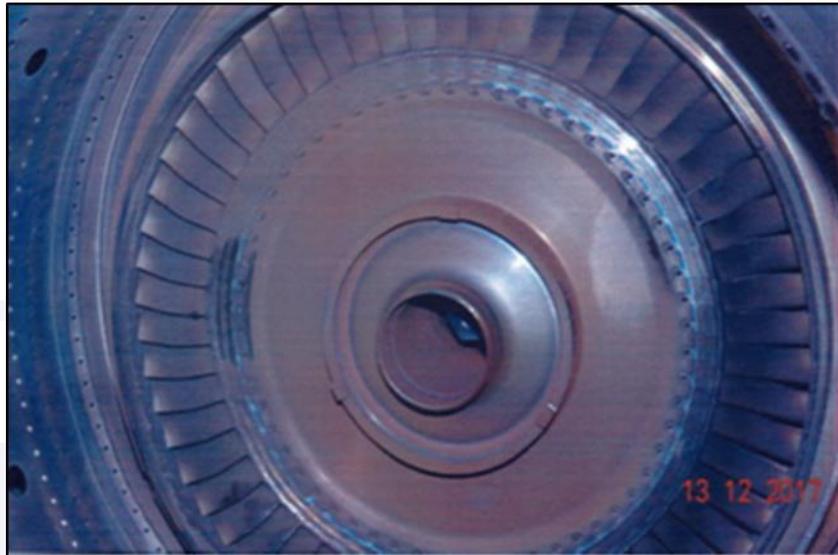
Rubbing marks on the rotor of the compressor drive turbine, rear side.
